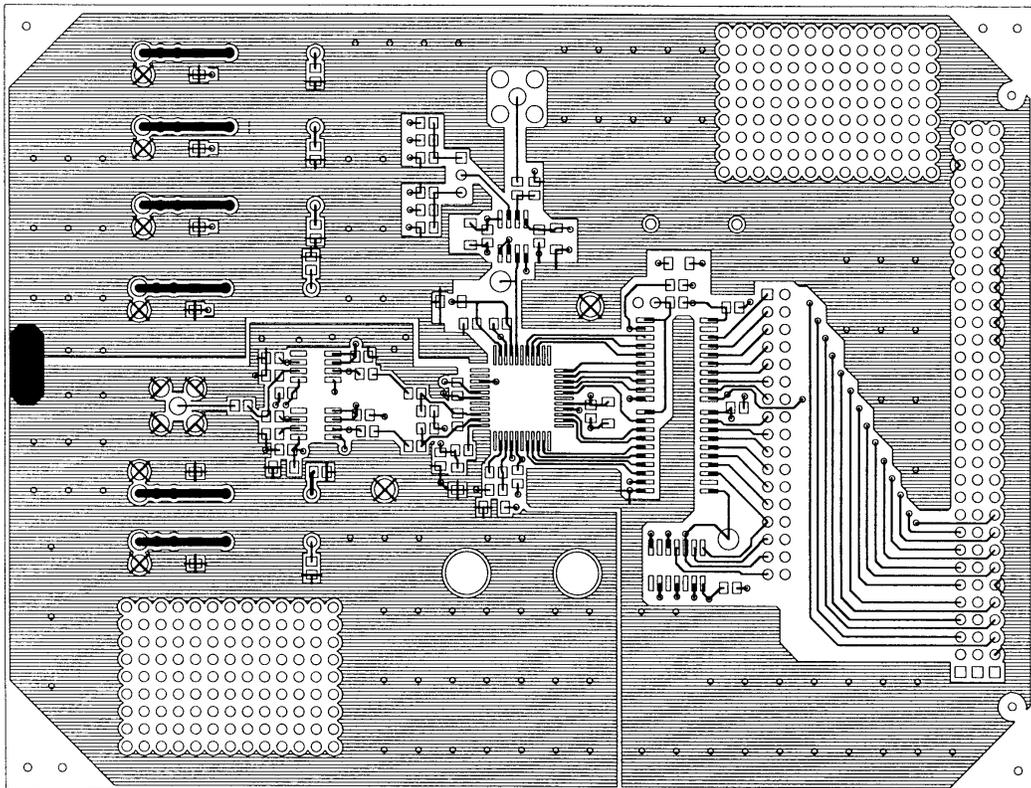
HI5905EVAL2 EVALUATION BOARD COMPONENT NEAR SIDE (LAYER 1)
